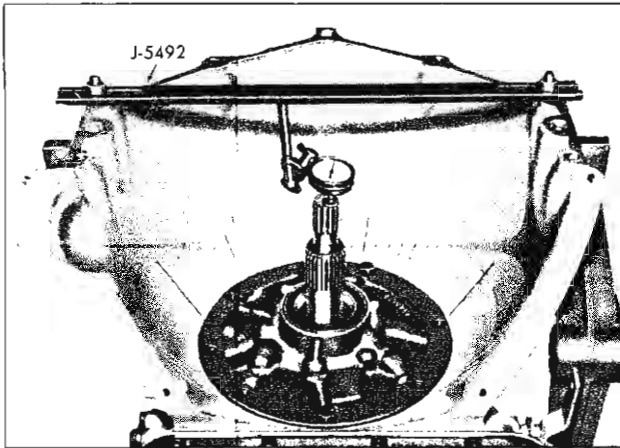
PG—Checking End Play for Proper Thrust Washer Selection
